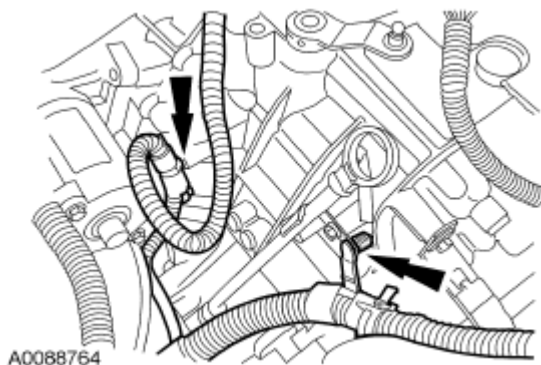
Locating Lower Wiring Harness Retainers From Transaxle
